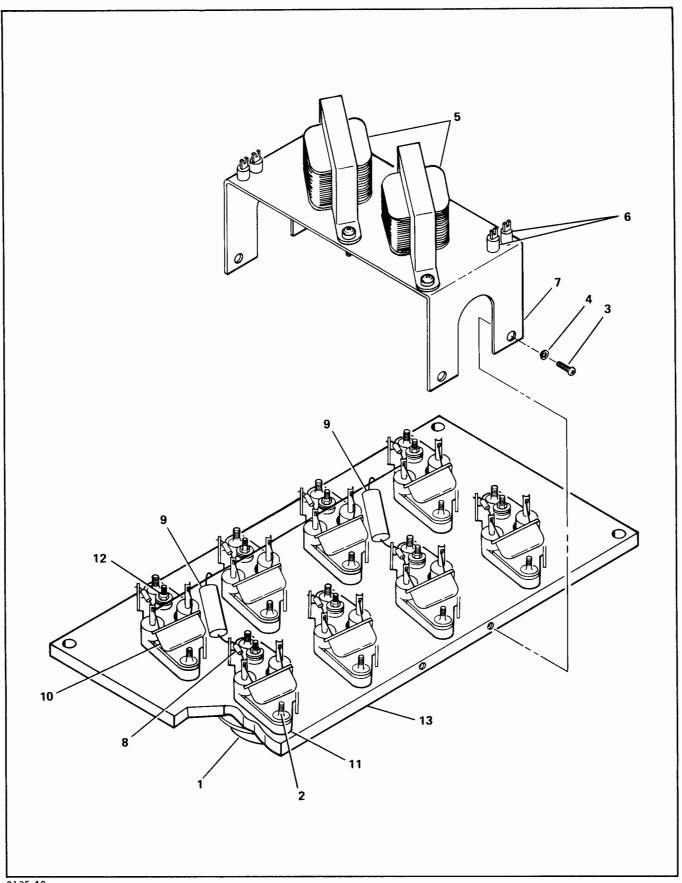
Rear Fan Panel Assembly, Exploded View
